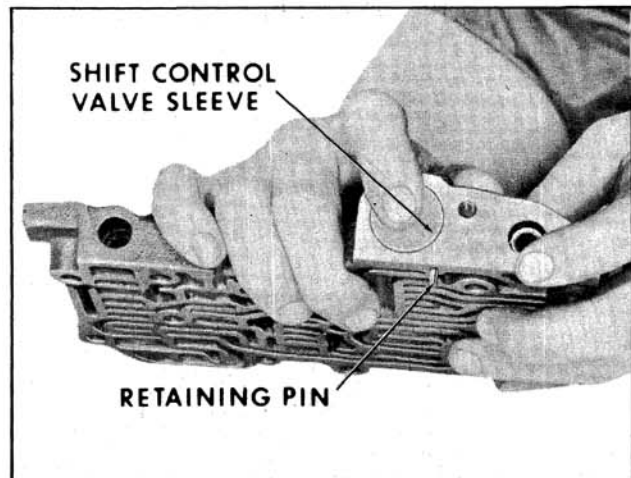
Removing Shift Control Valve and Shift Valve
